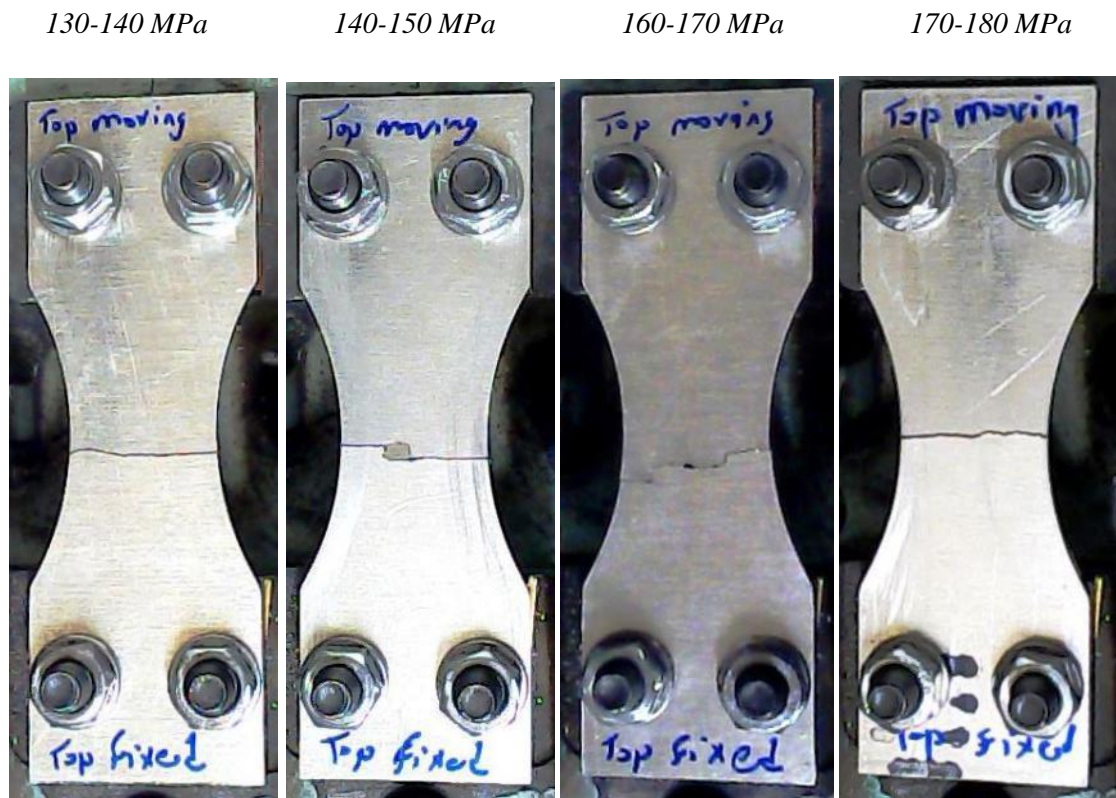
Fatigue Fracture Position of Base Material Coupons
